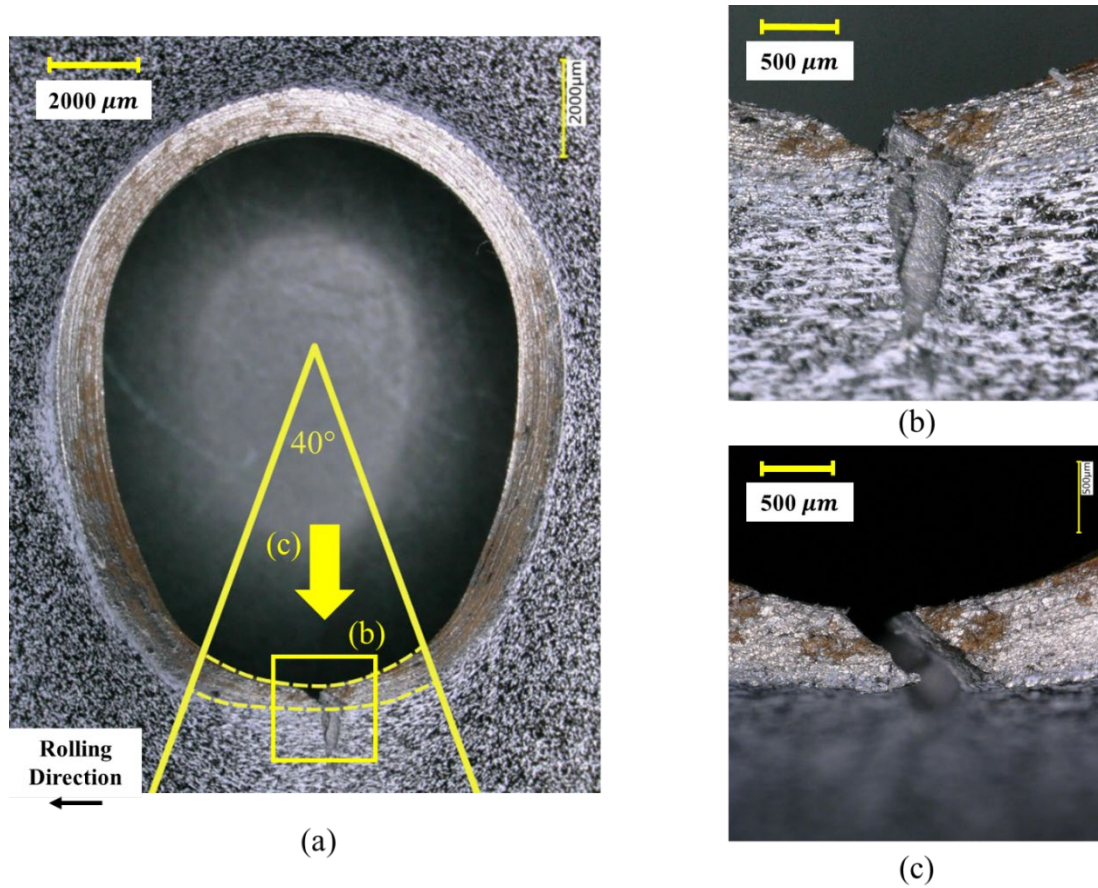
Specimen after the test for the first repeat with fracture initiation under uniaxial tension in the rolling direction: (a) top view, (b) close-up view in the fracture initiation area and (c) tilted close-up view. In (a), a 40° cone delimits the necking area, and the two edges of the hole are highlighted in this region with dotted lines.
